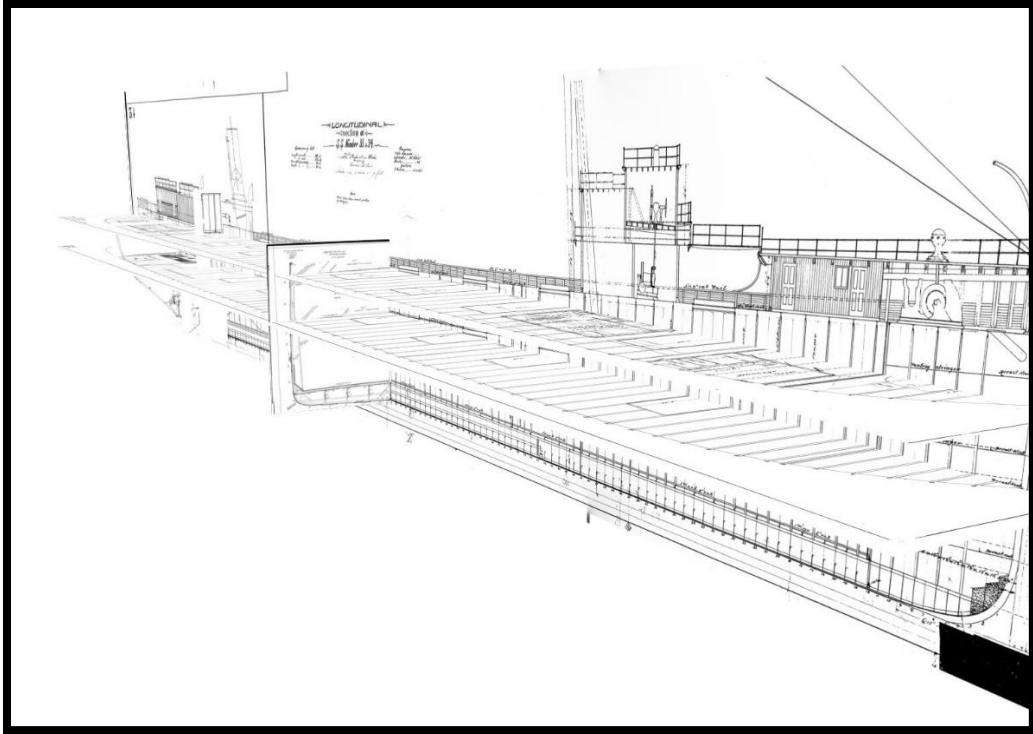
Builders' plans lined up (Image by Caleb O'Brien).
